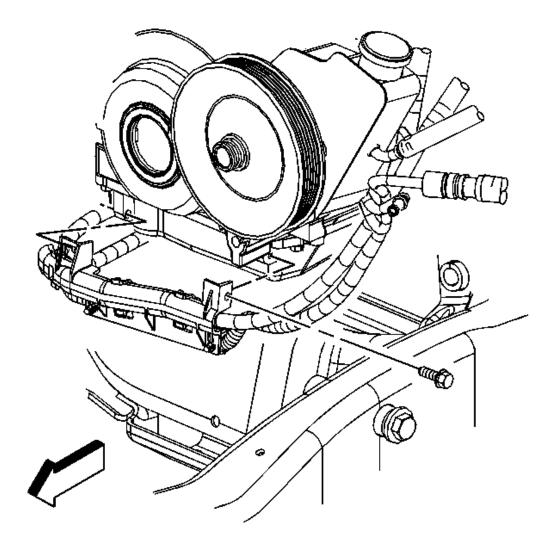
View Of Battery Cable Channel Bolt Courtesy of GENERAL MOTORS CORP.
